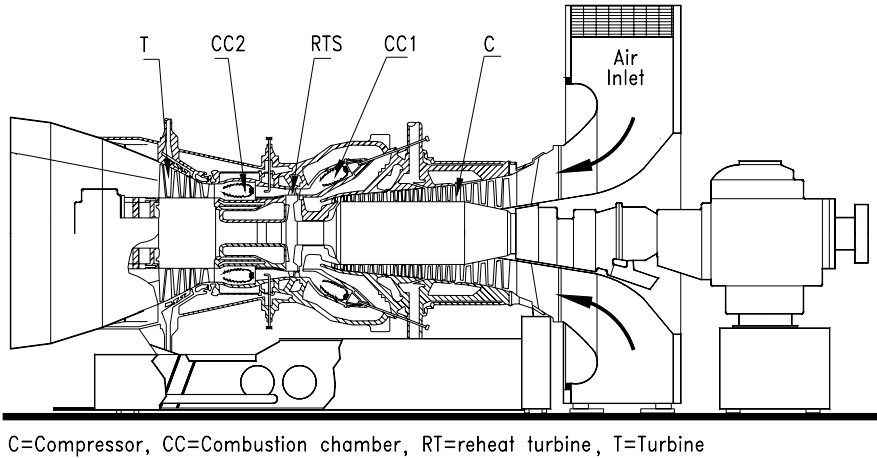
Schematic cross- section of GT-24 gas turbine engine with a single stage reheat turbine and a second combustion chamber, ABB
